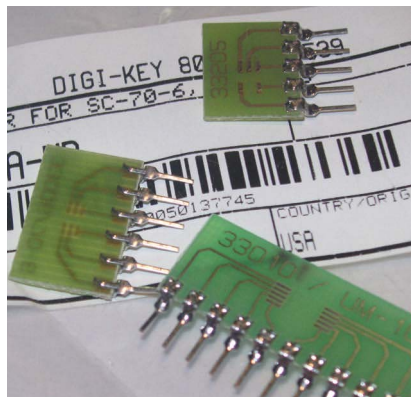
A huge selection of adapter boards spread out tiny packages to 100-mil spacing.
